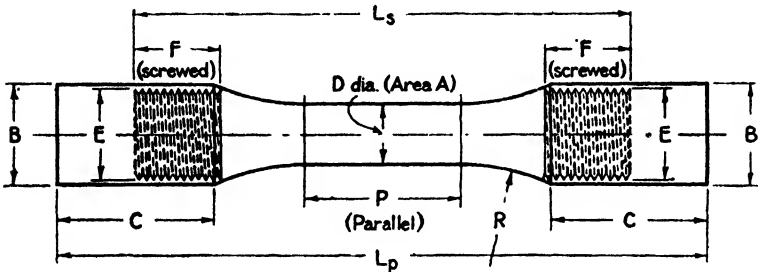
DIMENSIONS OF CAST IRON TEST PIECES
